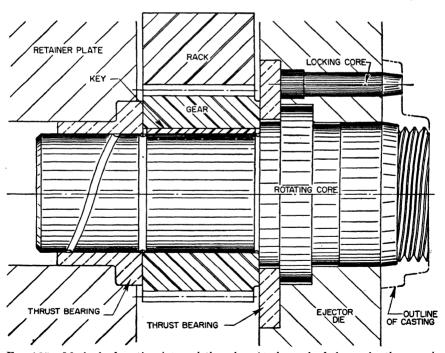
Method of casting internal threads. At the end of the cycle, the core is rotated with a rack-and-pinion mechanism. Internal threads usually are cast only if very steep and coarse pitched.
